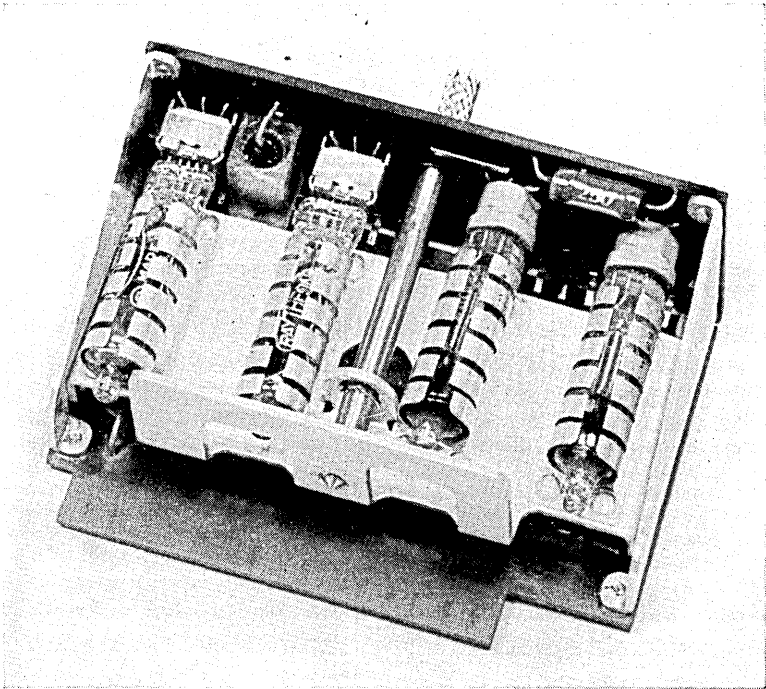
The miniaturized assembly is completed by installing the frame and folding the circuit board into an L-shape for mounting; to facilitate dip soldering, the circuit pattern is on the side away from the components
